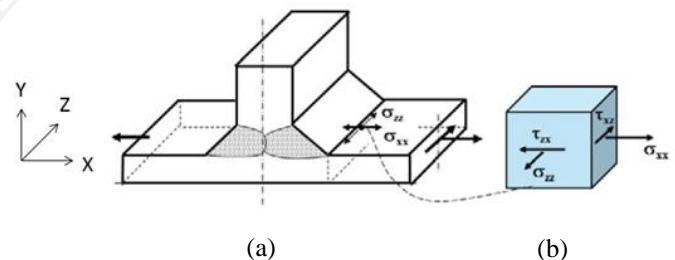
Stress state in the weld toe region of a welded joint (a) The overall geometry, (b) The stress state at the weld toe
